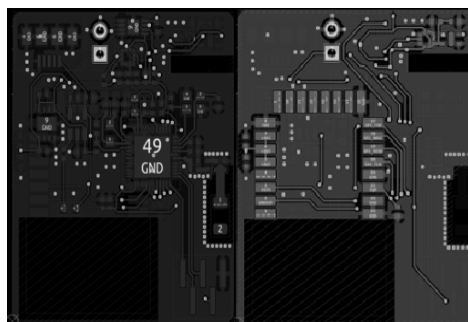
PCB mosaic top layer (red) and bottom layer (green)
